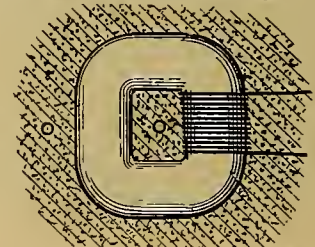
Plan Section of Mold, Showing Heating Coil
